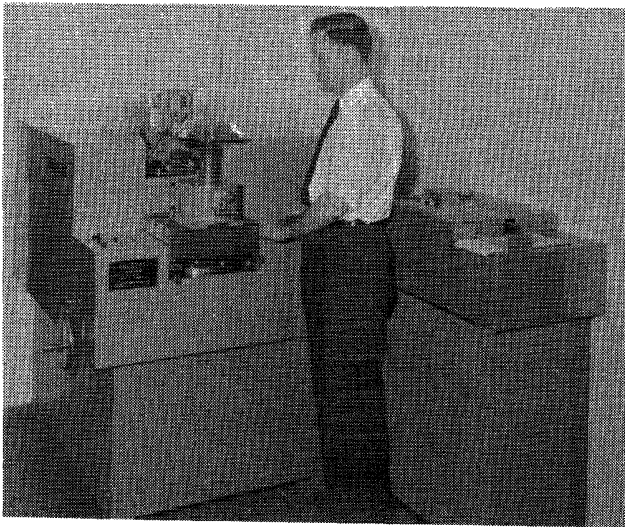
PROBOMAT tape-controlled automatic inspection machine in operation.
